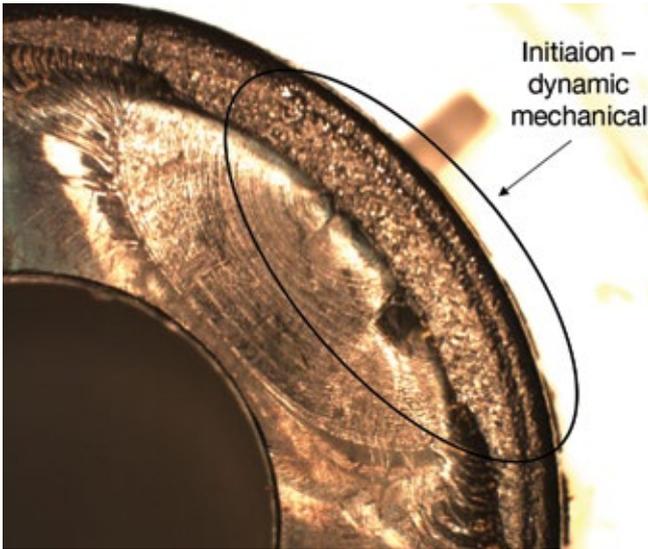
Typical fracture pattern of dynamic mechanical or fatigue failure in sulfone polymers
